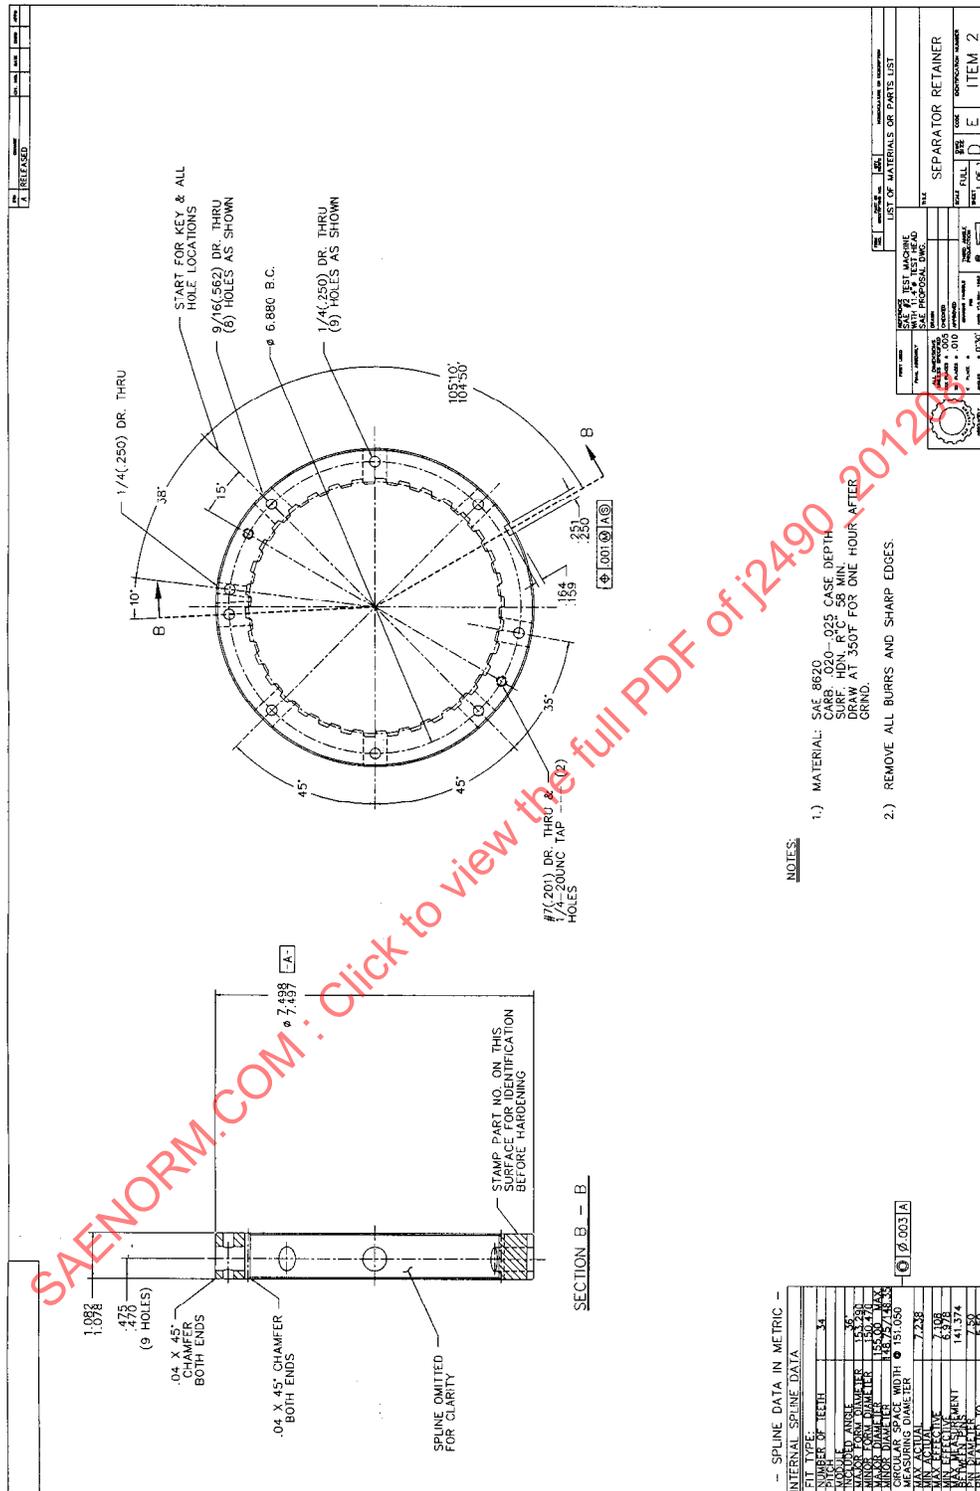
ITEM 2 - SEPARATOR RETAINER
